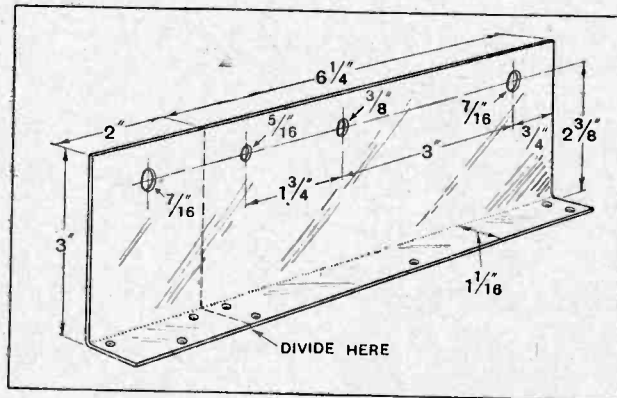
Construction of the supporting brackets, of sheet aluminium, 1/8 in. thick.
